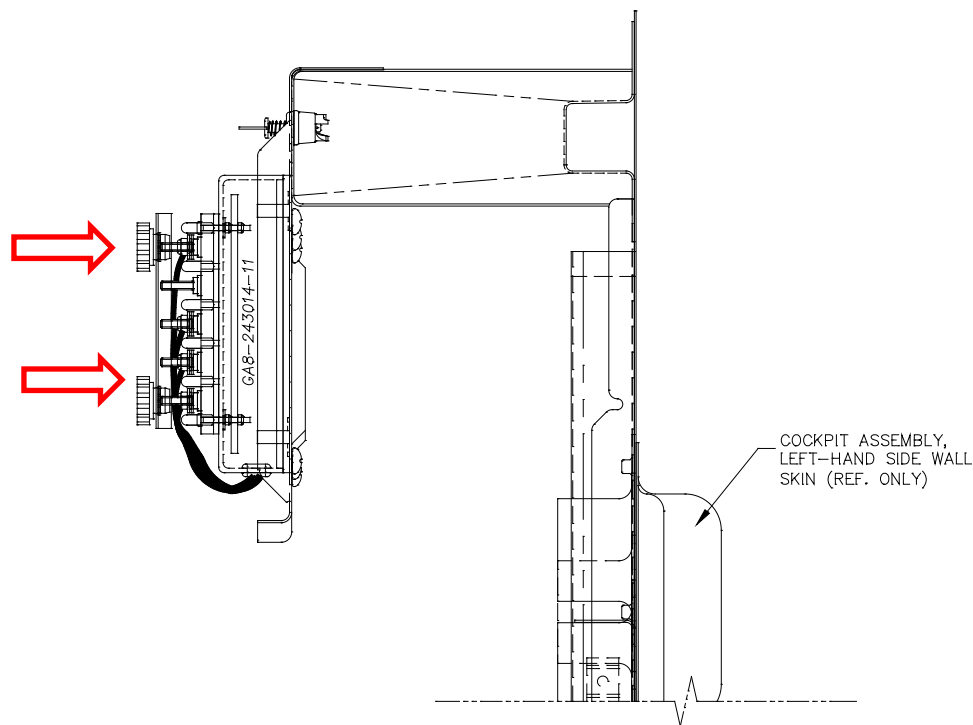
View looking directly at the side of the Caution Tray Assembly
